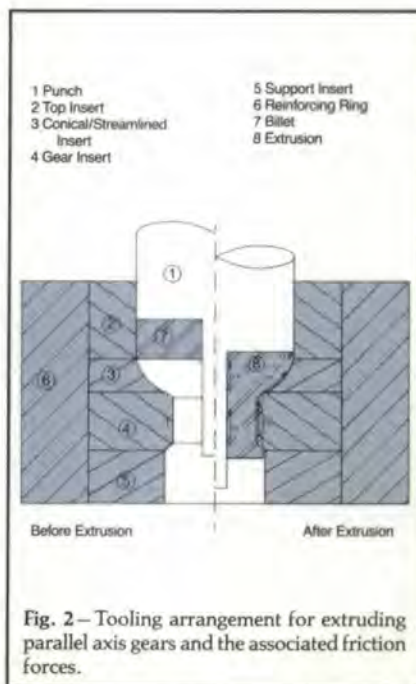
Tooling arrangement for extruding parallel axis gears and the associated friction forces.
